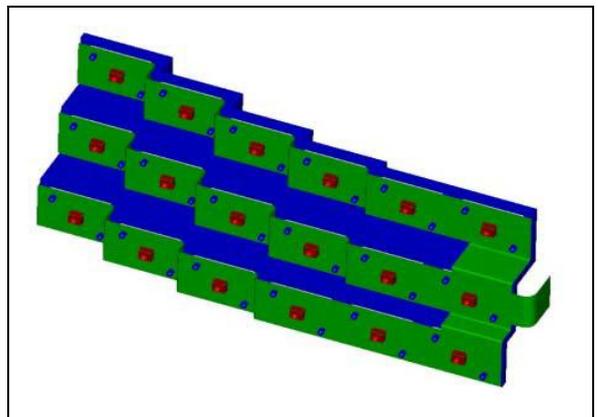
The assembly in which each LED segment is separately mounted on the alignment pins of the plastic carrier
